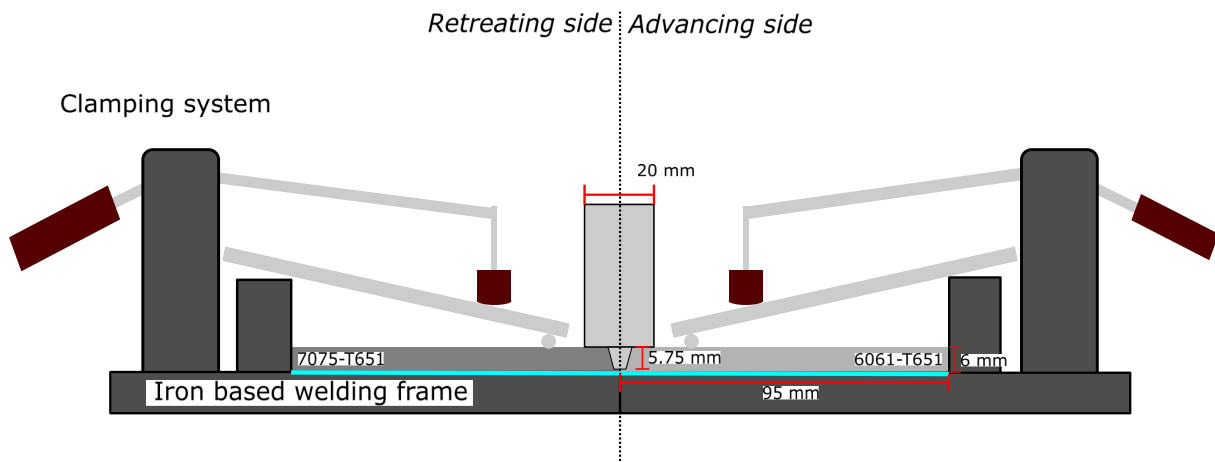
Schematic of the Al/Al butt-joint welding setup. The blue line signals where a backing plate could be inserted if needed.
